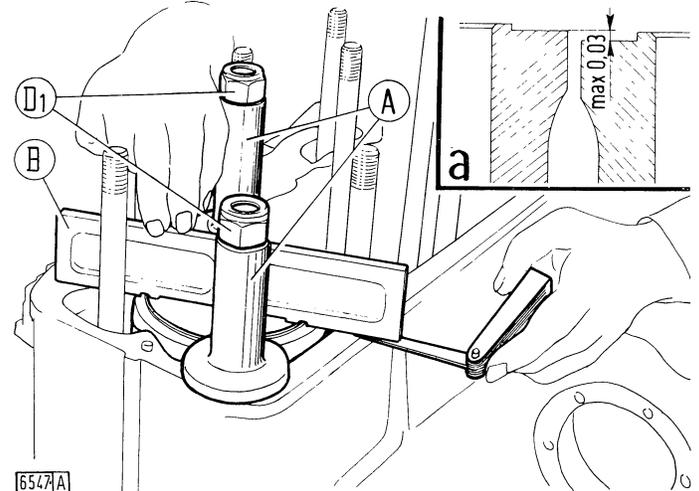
Checking Liner Protrusion Above Engine Block Top
